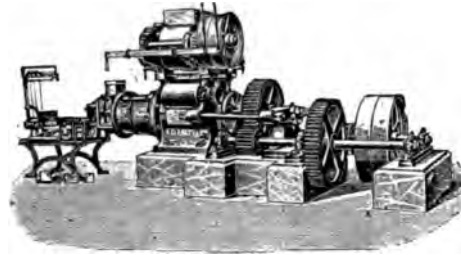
Screw Machine with Rollers and Distributing Cylinders (Laeis et Cie.).
